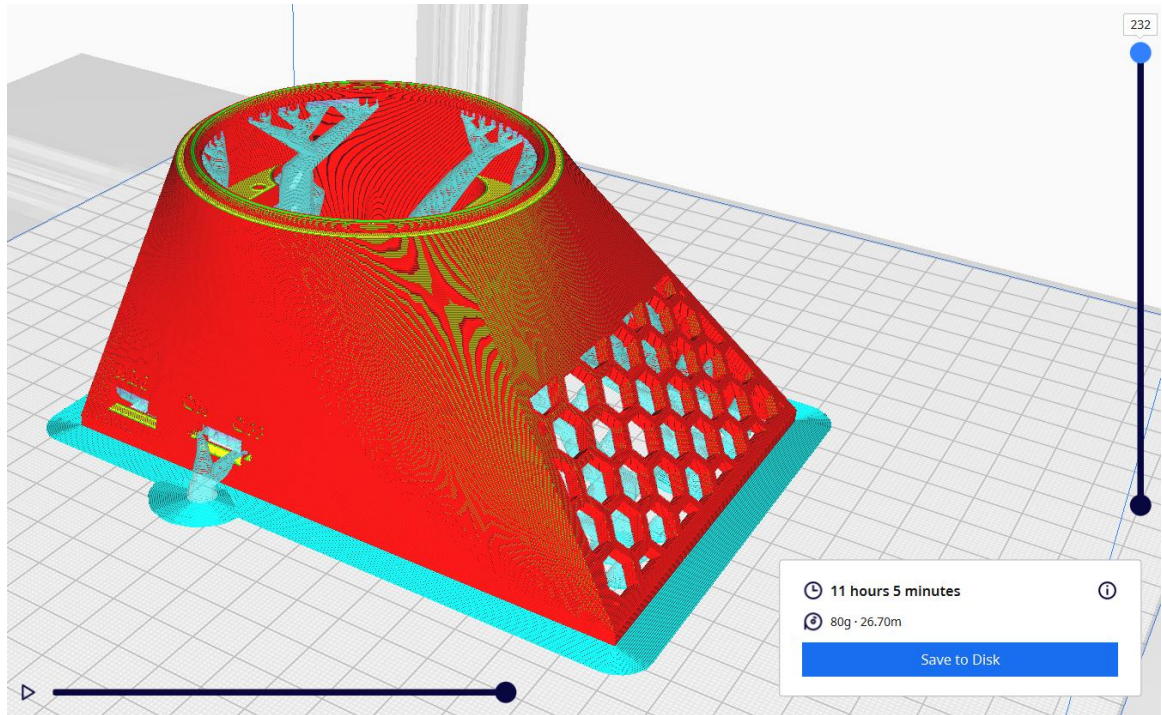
Cura Slicing Software Writing the G-Code for the 3D Printer.
